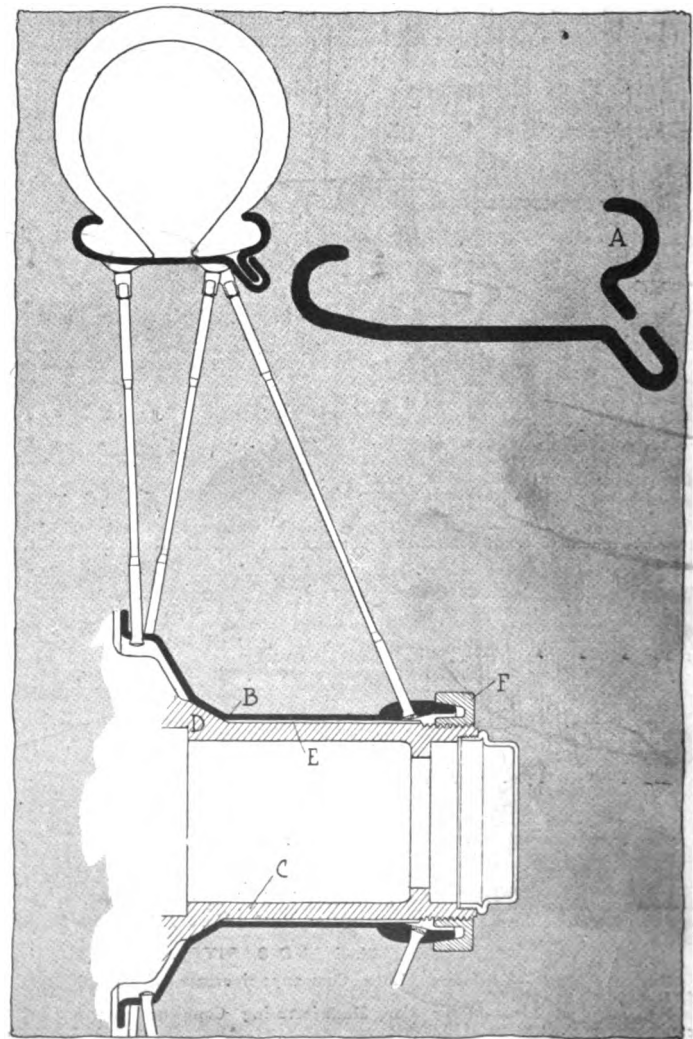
Section through Rudge-Whitworth wheel and Houk rim
